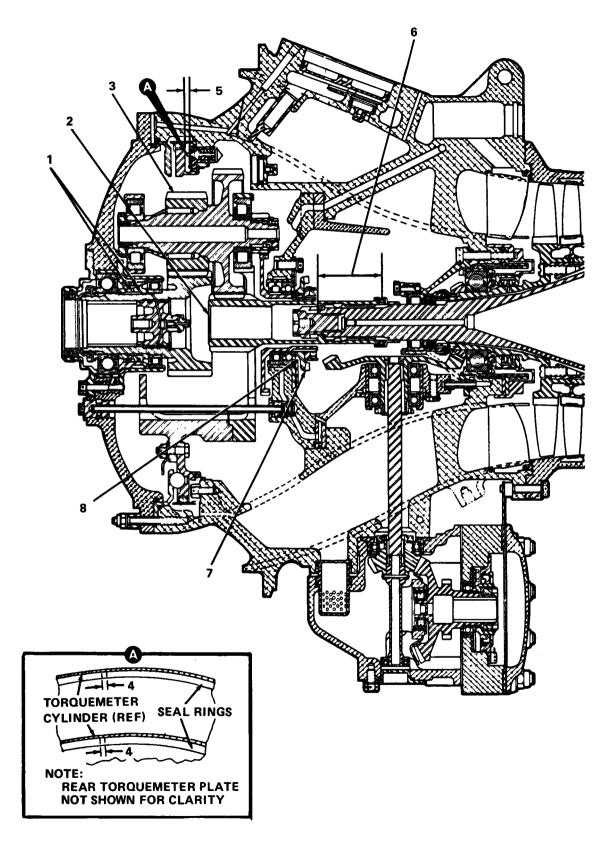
Fits, Clearances and Backlashes (T53-L-11 Series Engines) (Sheet of 5)
